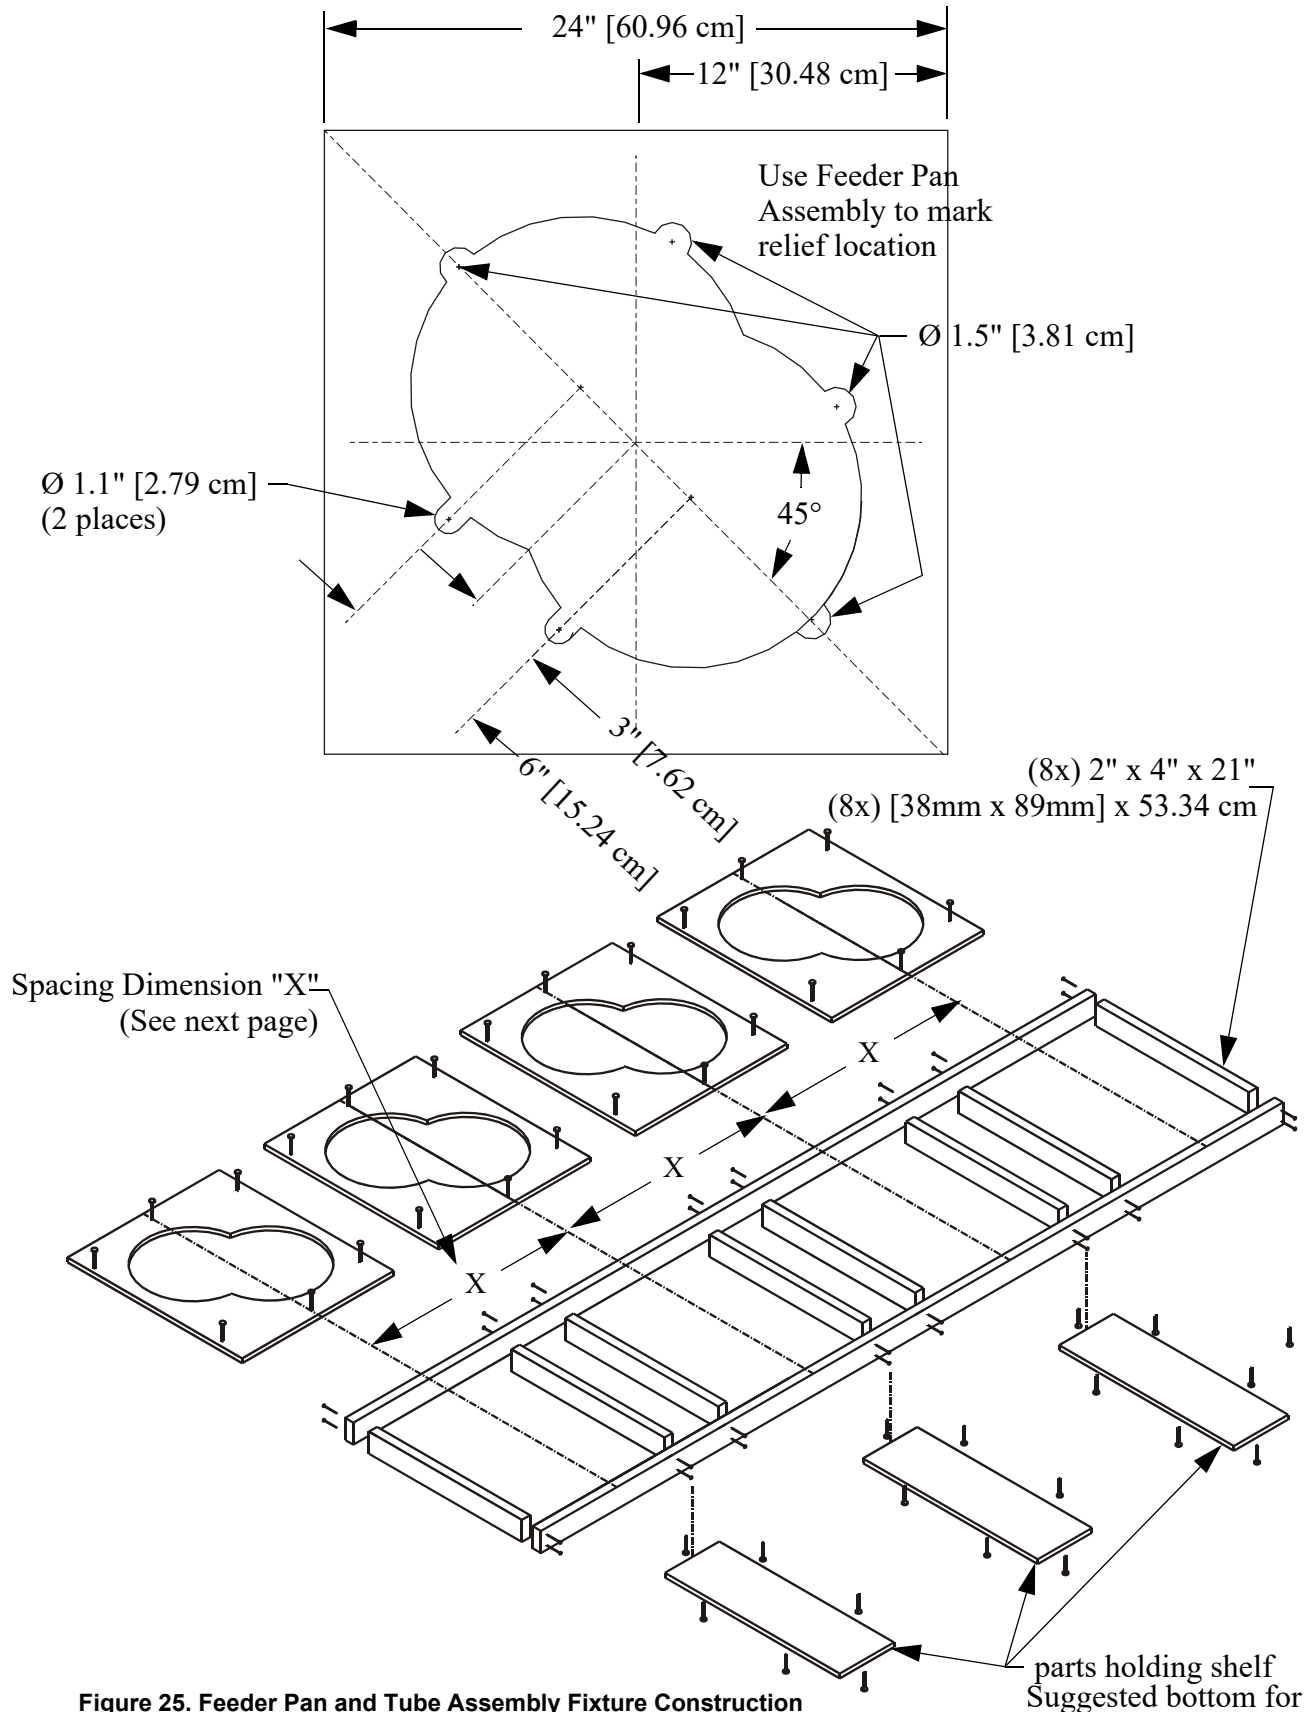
Feeder Pan and Tube Assembly Fixture Construction
